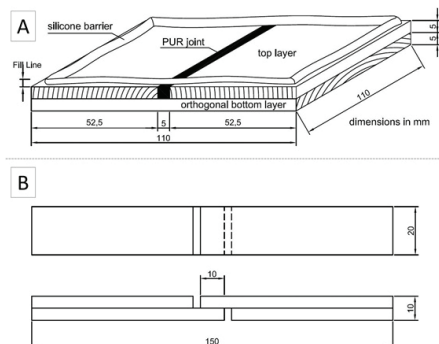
Experimental setup and specimen dimensions for the delamination test (mm) A); Specimen dimensions used for the tensile shear strength (mm) B).
